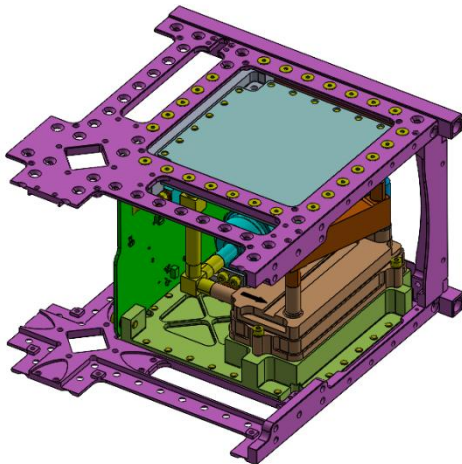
3D CAD model of miniMPL Flight Model assembly integration into the CubeSat frame.
